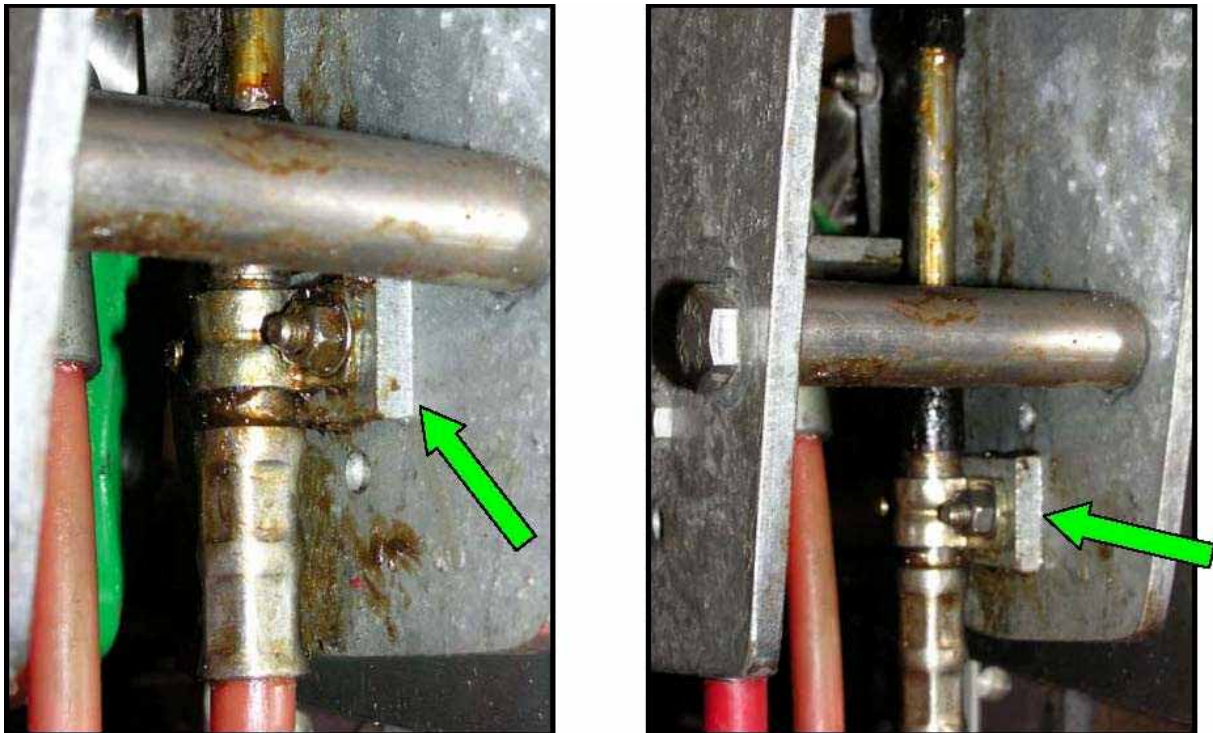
Mounting point of the bowden cable at the foundation plate; original left, modified right
